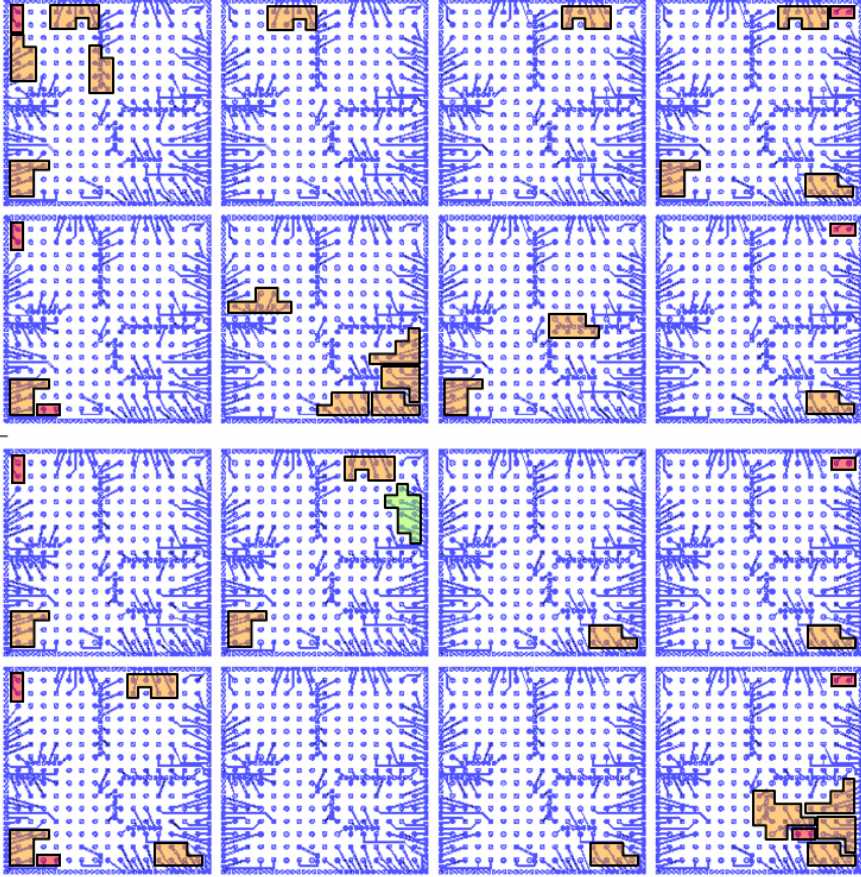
Rosettes, ID, and Buried Layer Heater Access Points for Second Level Assembly Study
